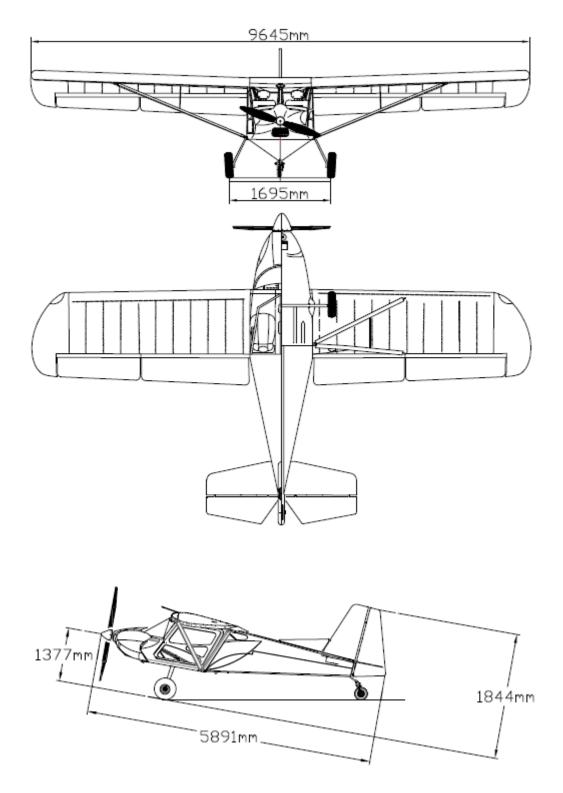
Dimensions - Bushcat Tail-Dragger
